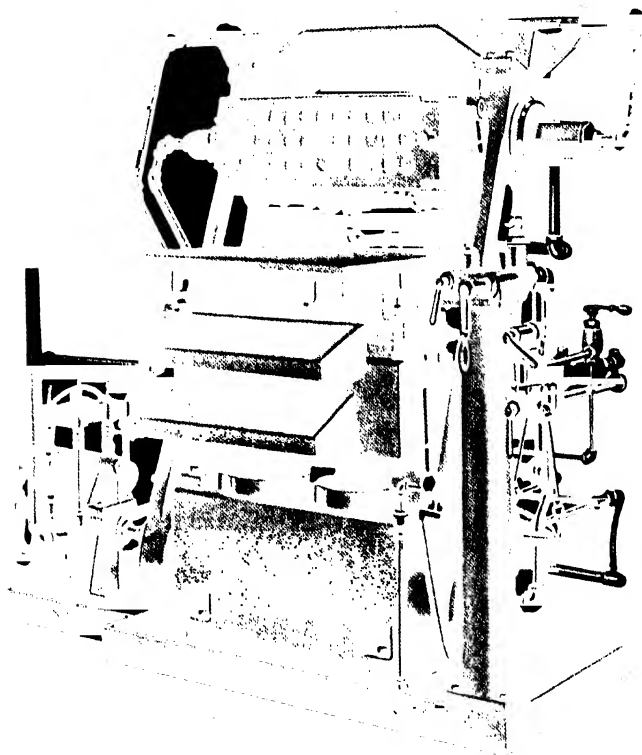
Automatic Press, Showing Head Tilted Into Open Position.
